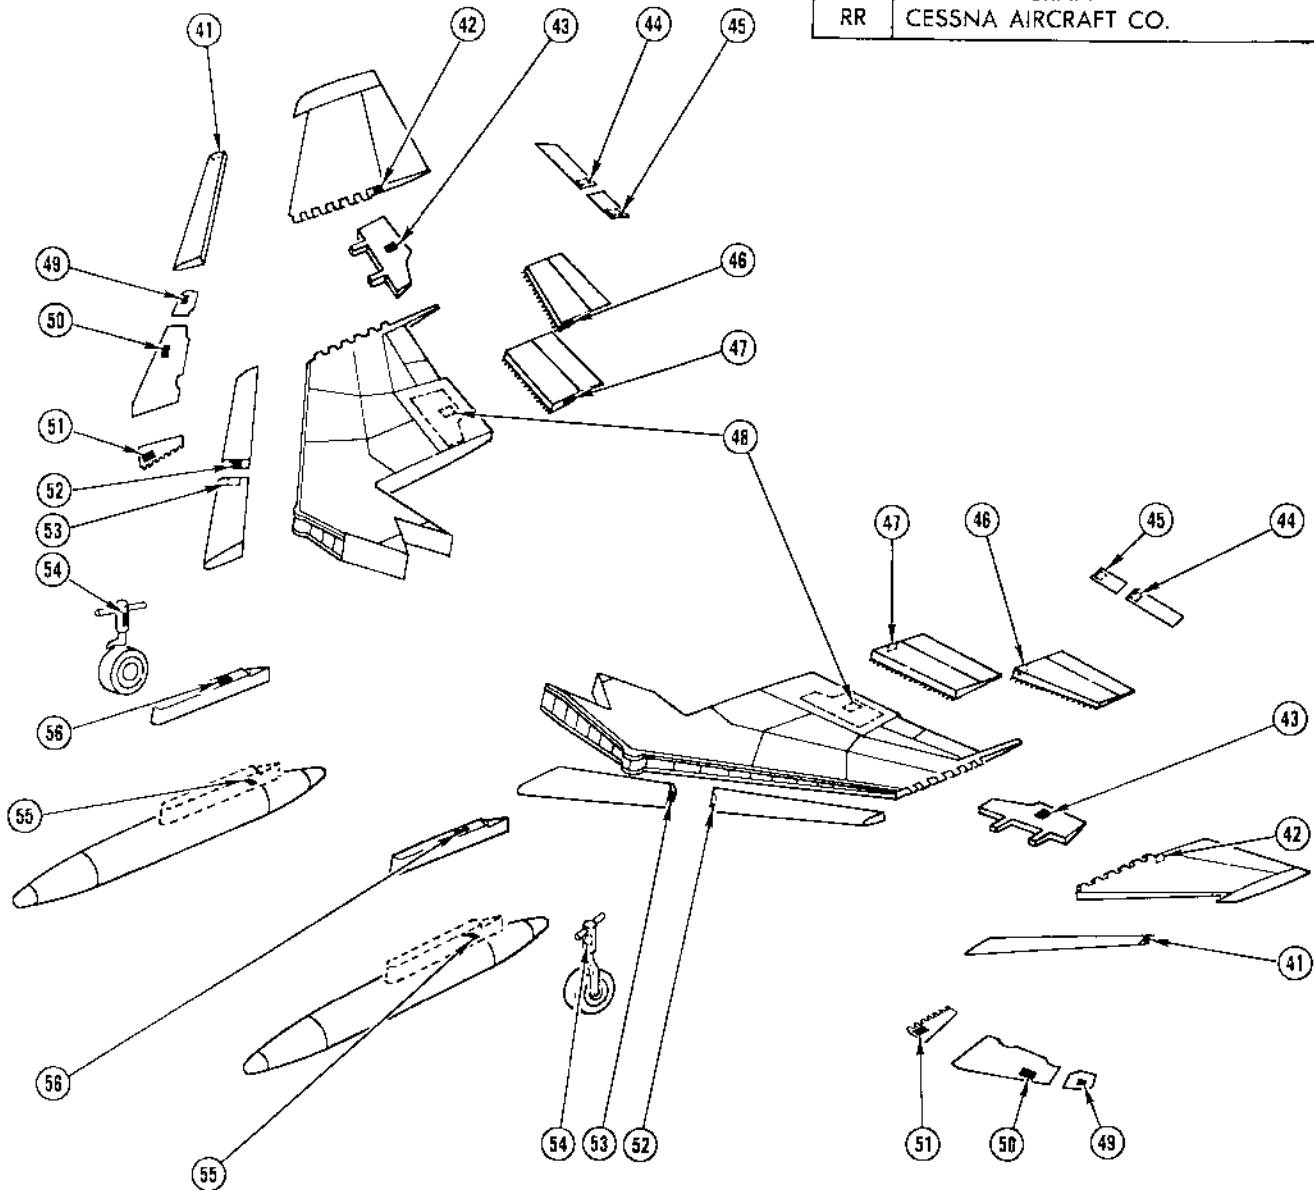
Identification and Modification Plates (Sheet 2 of 3)
